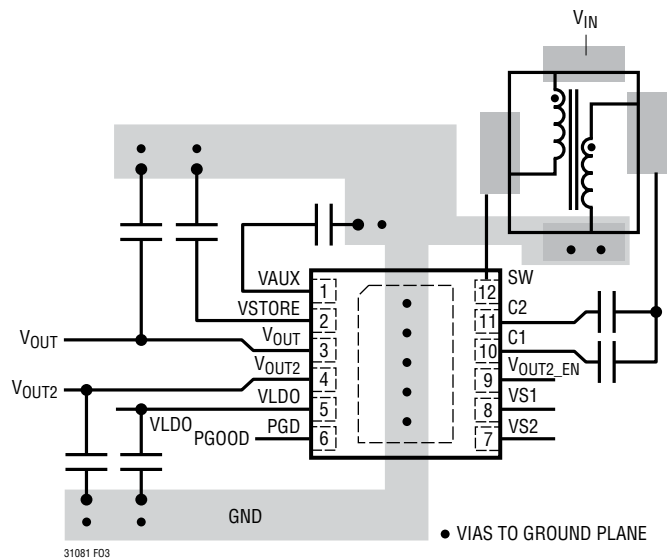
Example Component Placement for Two-Layer PC Board (DFN Package)
